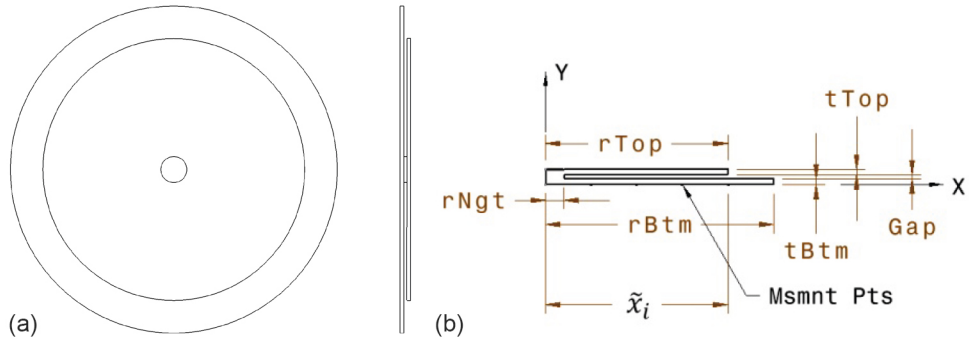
Projection views of the weld sample, (b) axisymmetric model with geometric parameters and locations of measurement points \tilde{x}_i .
